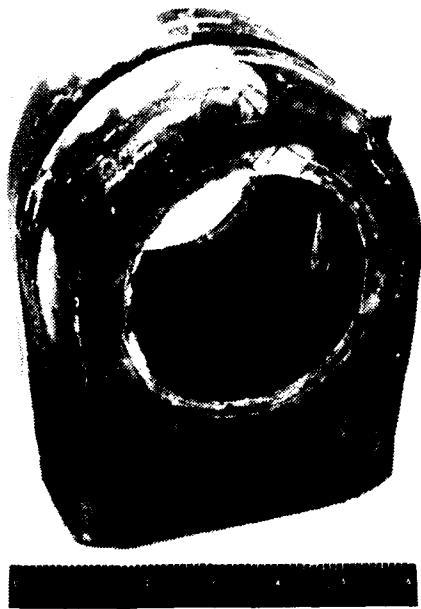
Root End Section of CH-47 Rotor Blade
